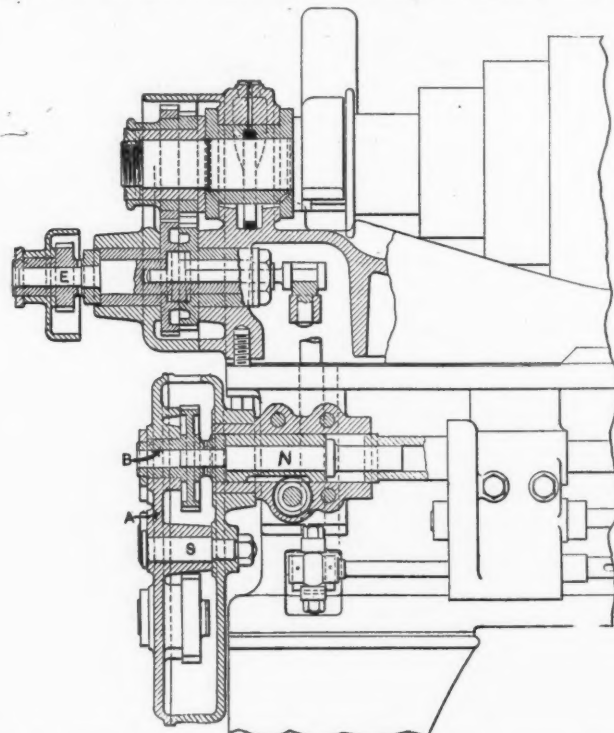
SECTIONAL VIEW OF IDEAL LATHE GEAR-BOX, SHOWING CLUTCH ARRANGEMENT.
